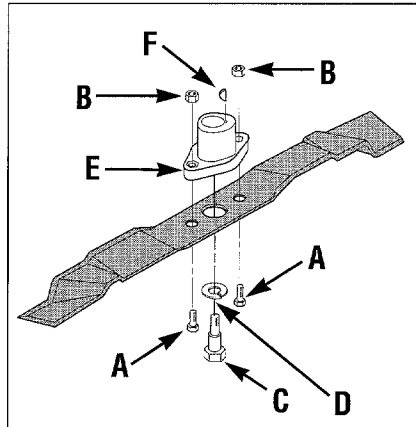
Remove/Install blade (except Models 34311 & 34328).
